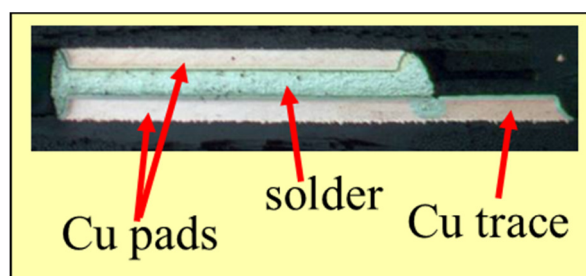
Elevational cross-section showing Cu pads, solder, and the beginning of the Cu trace
